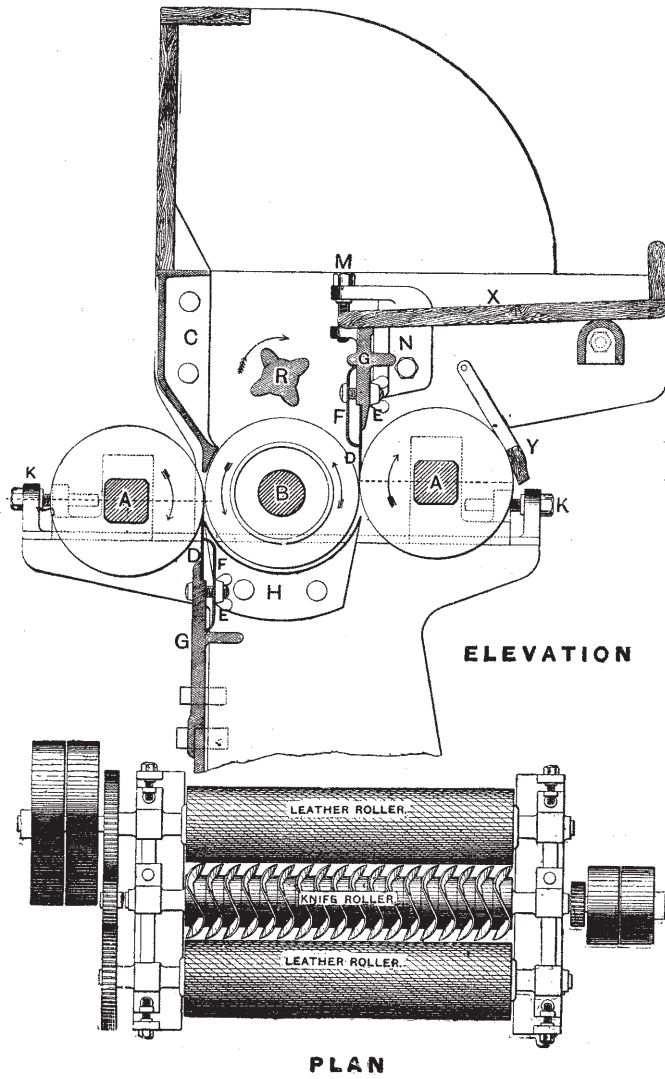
KNIFE ROLLER GIN. Plan and Section.
